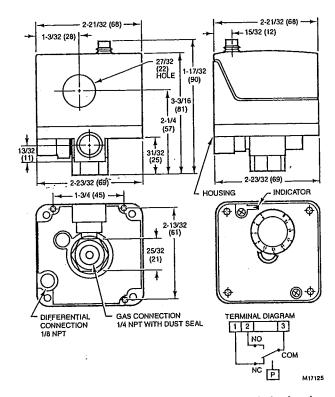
C6097 1/4 in. NPT Mount dimensions in in. (mm).
